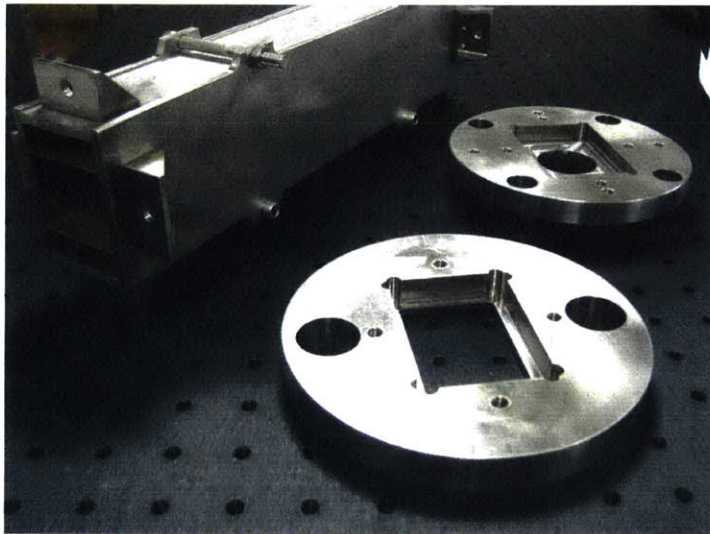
Photograph of the 352 mm unbrazed MTM1 structure taken on October 17, 2014 before high power testing. 3 of the 4 bolts that hold the two side plates are visible in the photograph. The top, bottom, and metamaterial plates are then sandwiched between these two side plates and sit in pockets which were machined into the side plates. The whole structure then slides into pockets in two end flanges to which it is then bolted and which are shown on the right hand side of the photo. For scale, the spacing of the holes on the optical table the structure rests on is 1 inch.
